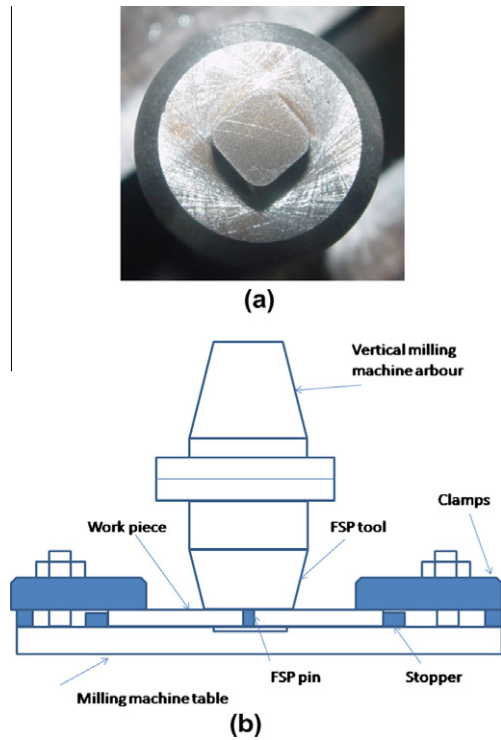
(a) FSP tool photo showing the tool shoulder and the square pin. (b) Experimental set-up of FSP, El [6].
